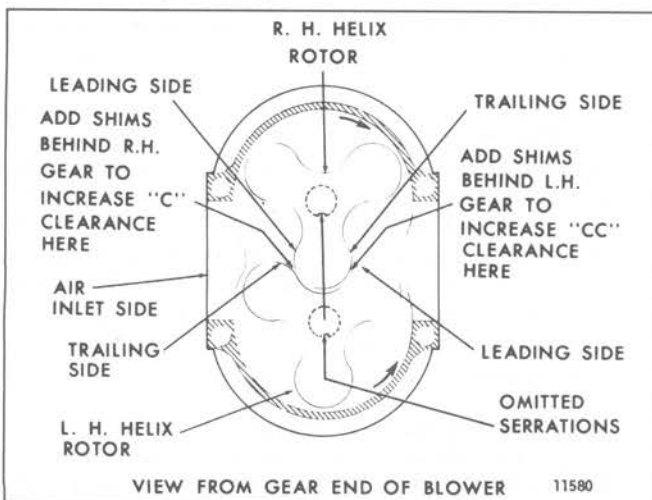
Diagram Showing Proper Location of Shims for Correct Rotor Lobe Clearances
